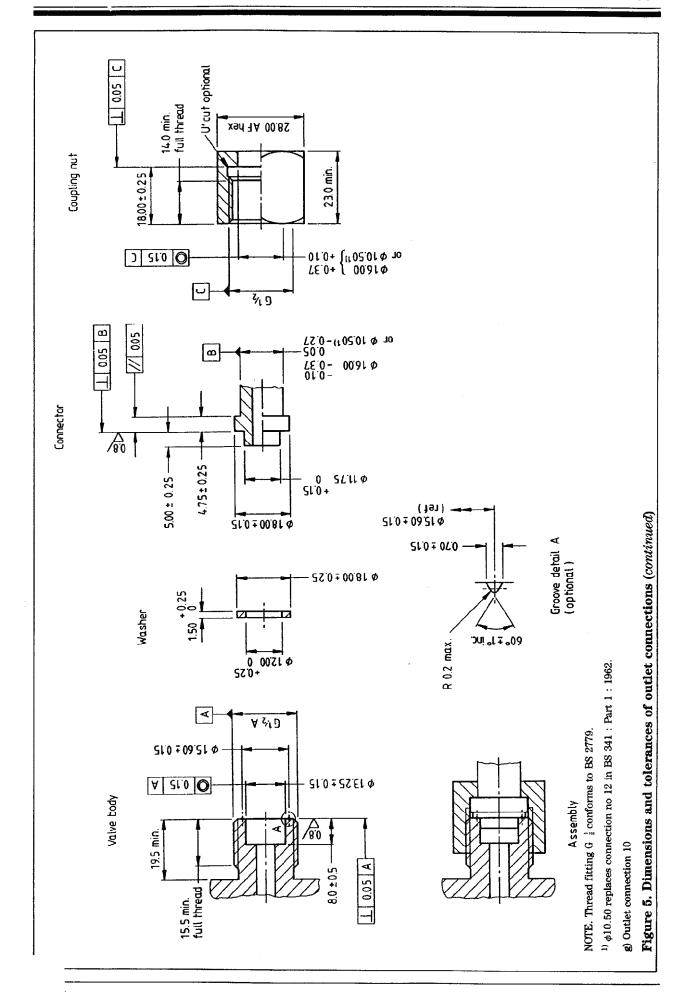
Dimensions and tolerances of outlet connections (continued)
